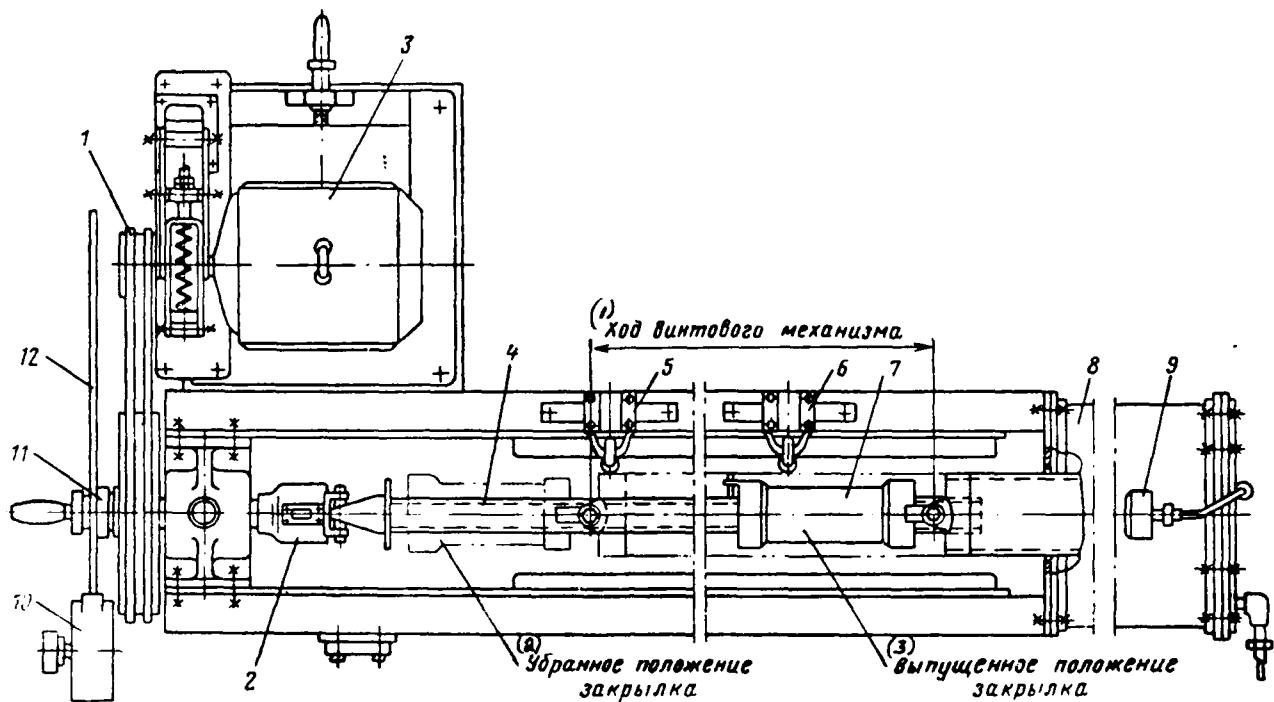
Run-in table and testing screw mechanism of flap control: 1 - belt drive; 2 - universal joint; 3 - electric motor; 4 - screw; 5 and 6 - limit switches; 7 - screw mechanism; 8 - pneumatic cylinder; 9 - manometer; 10 - loads; 11 - drive shaft; 12 - rack.
